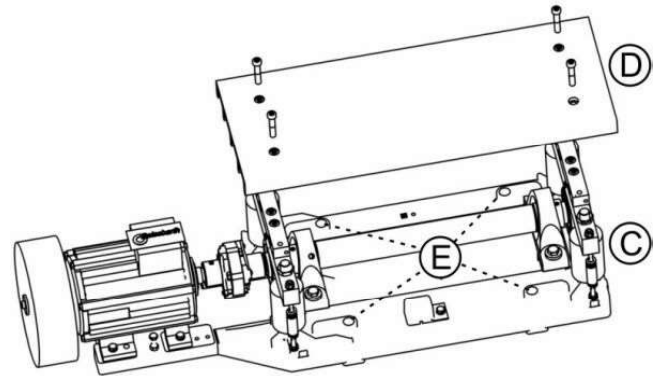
Drive unit and swivel plate (suspension tester SDL 430)
